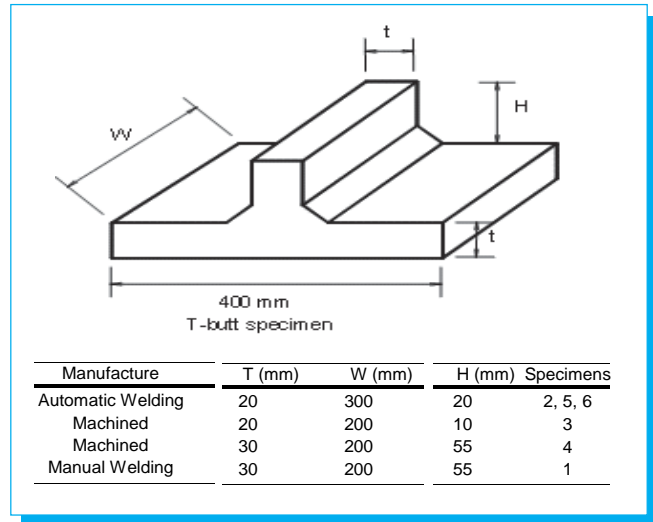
T-butt welded and machined specimens dimensions.
